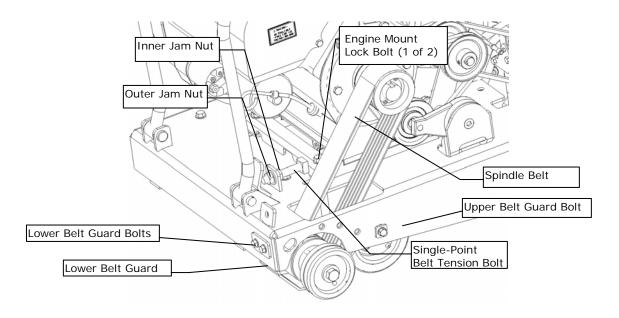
Spindle Drive Belt Adjustment & Replacement
